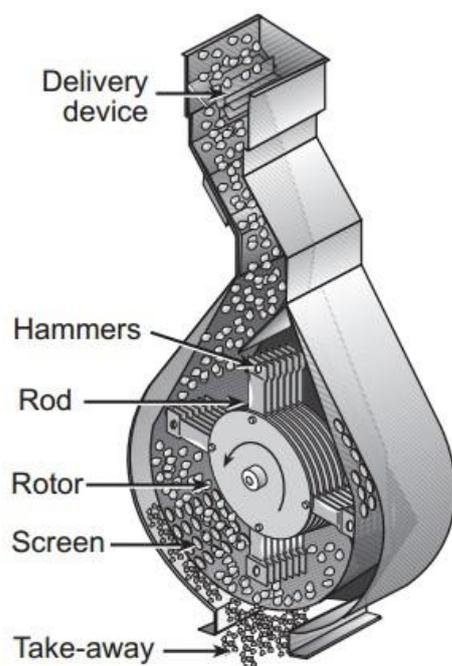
Hammer Mill (adopted from www.crusherindustry.com).
